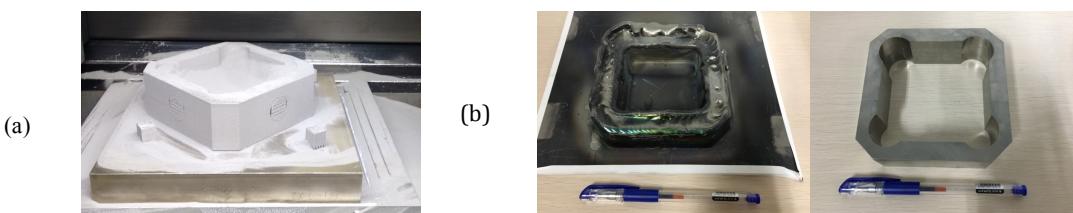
Gimbal manufactured using (a) laser powder bed and (b) wire feed before/ after machining
